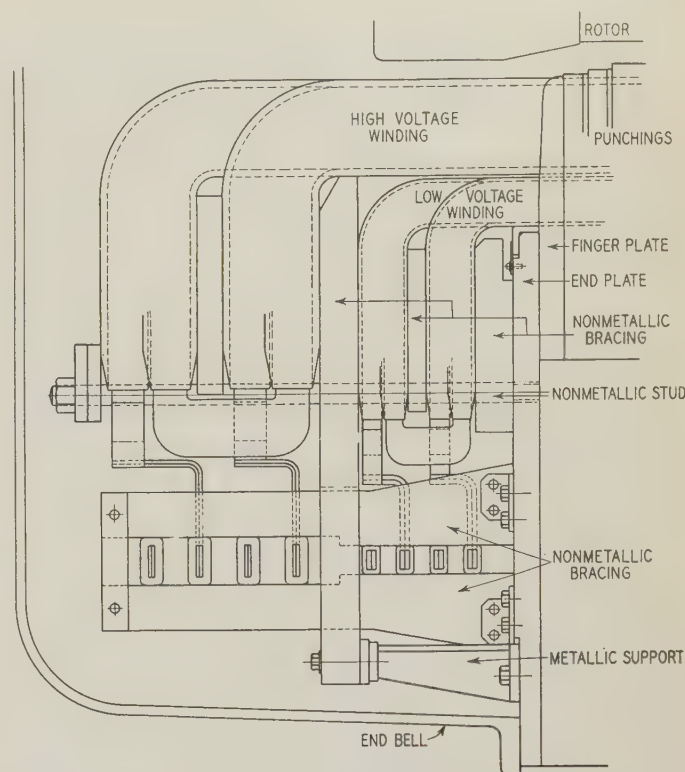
A method of providing graded insulation for stator windings, by using 2 superimposed single layer windings
